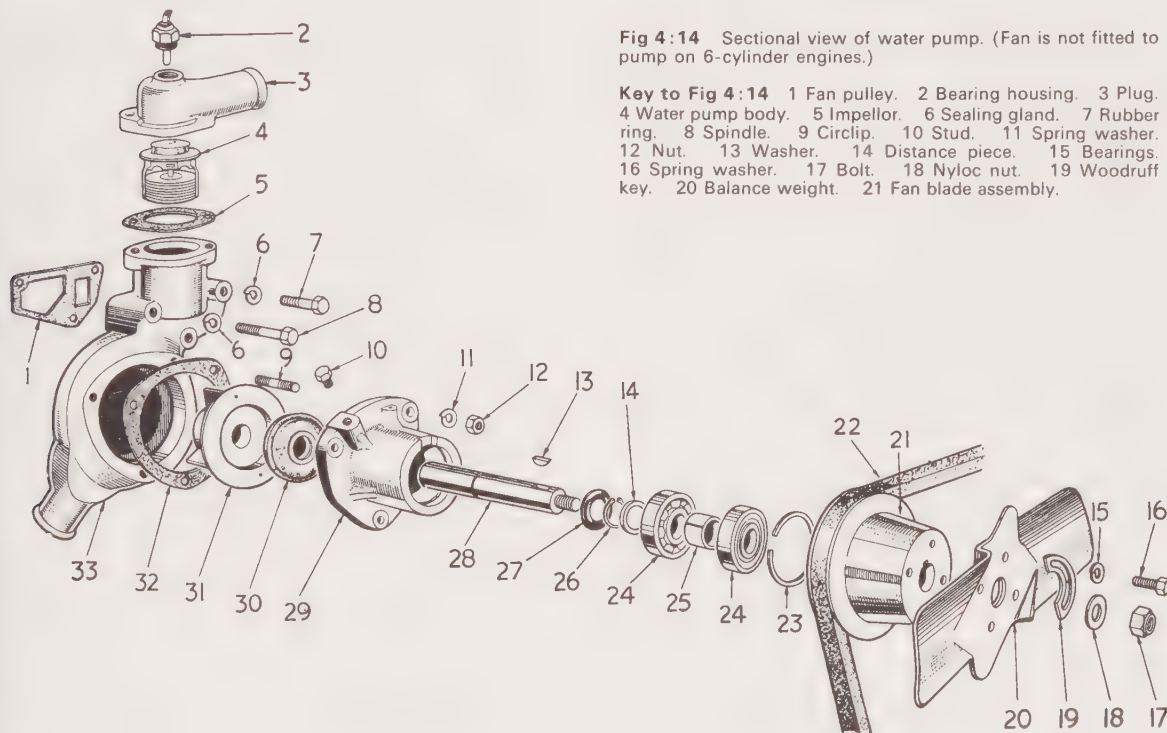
15 Components of water pump. (Fan is not fitted to pump on 6-cylinder engines.)
